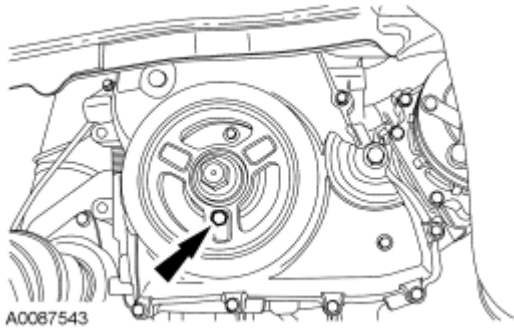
Aligning Crankshaft Pulley Bolt Holes
